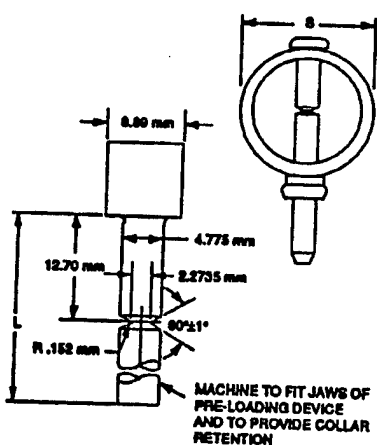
Dimensional Requirements of Type 1c Bend Specimens
